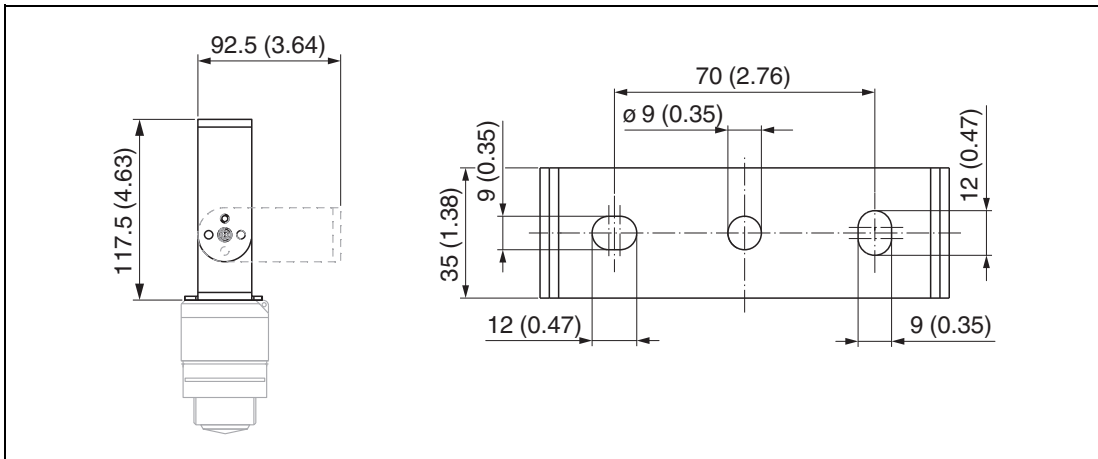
Dimensions of mounting bracket, engineering unit: mm (inch)
